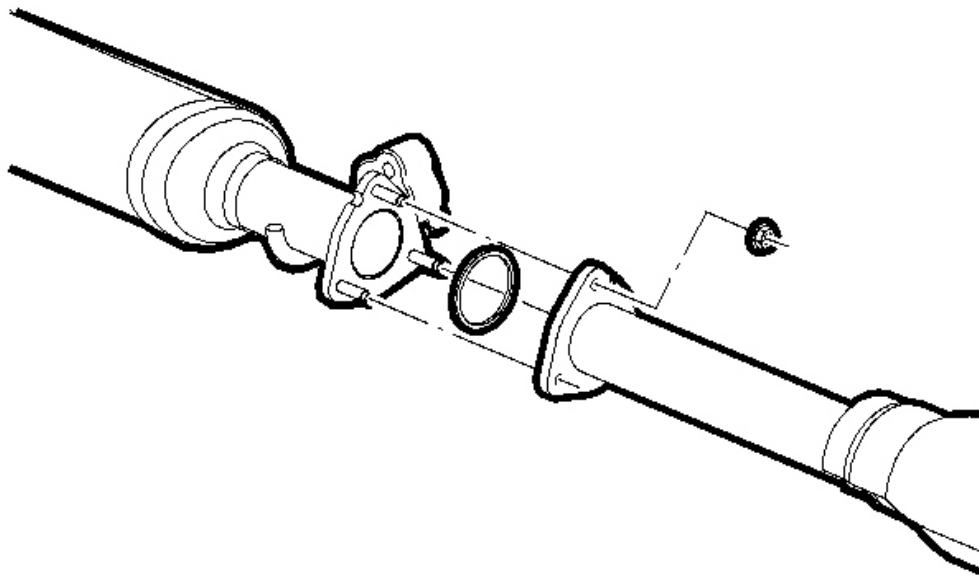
View Of Gasket Onto The Front Pipe Flange
